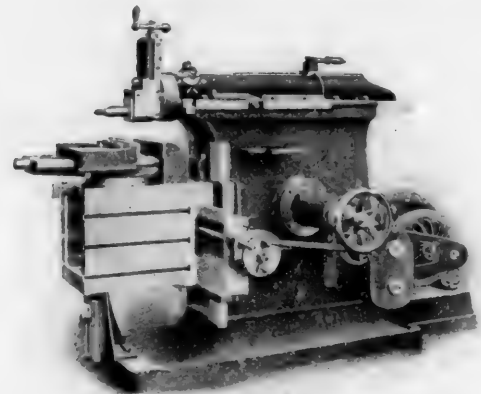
24-IN. MOTOR DRIVEN SHAPER.
